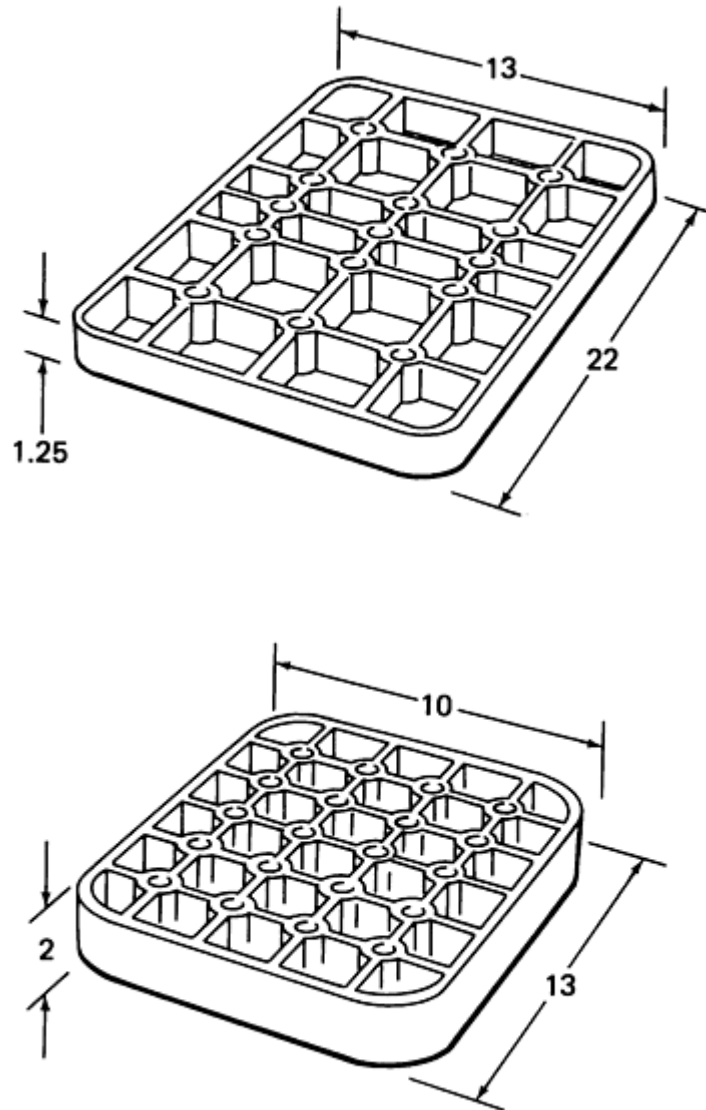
Typical HT alloy carburizing furnace trays. Dimensions given in inches
